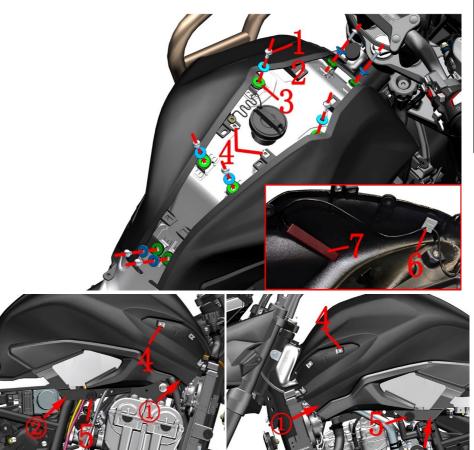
FUEL TANK COMPONENT		Fuel tank assembly component 1	CHK	(0)
